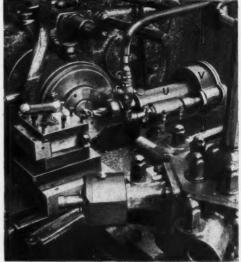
Another Ward machine is equipped with an air-driven milling spindle, as here shown, for operations on indicator shafts
